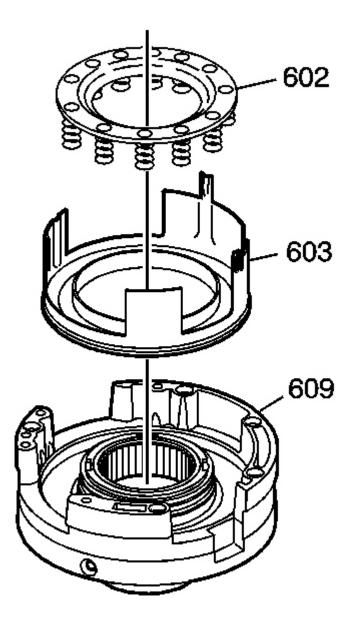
Removing Spring Assembly & Fourth Clutch Piston Assembly Courtesy of GENERAL MOTORS CORP.
